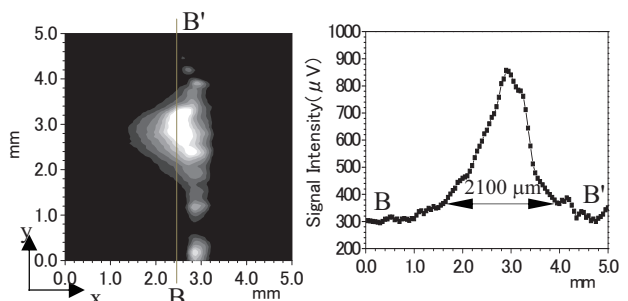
SLM photograph of the entire image of the weld defect
